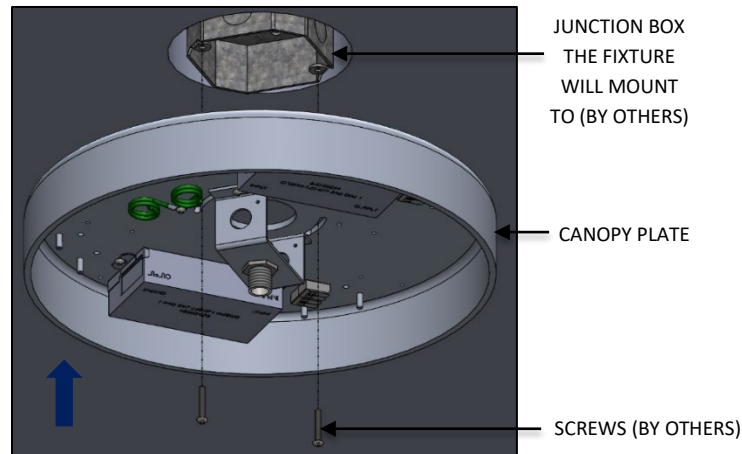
CANOPY ASSEMBLY INSTALLATION
